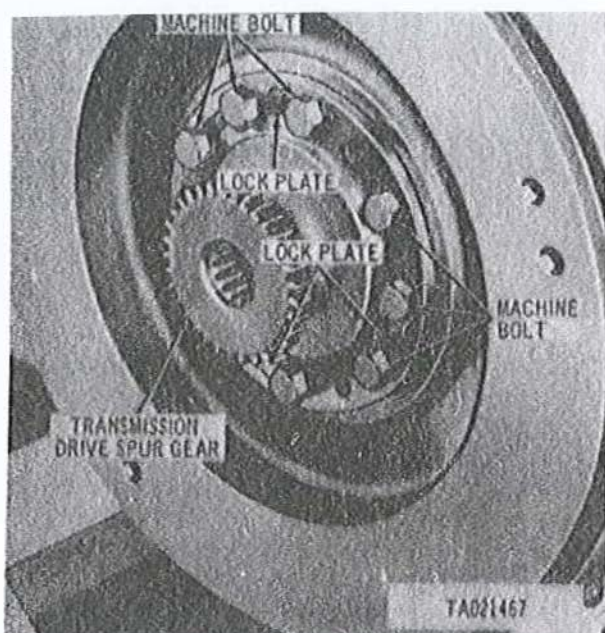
Removing or installing transmission drive spur gear, model AVDS-1790-2C and AVDS-1790-2D engines.
